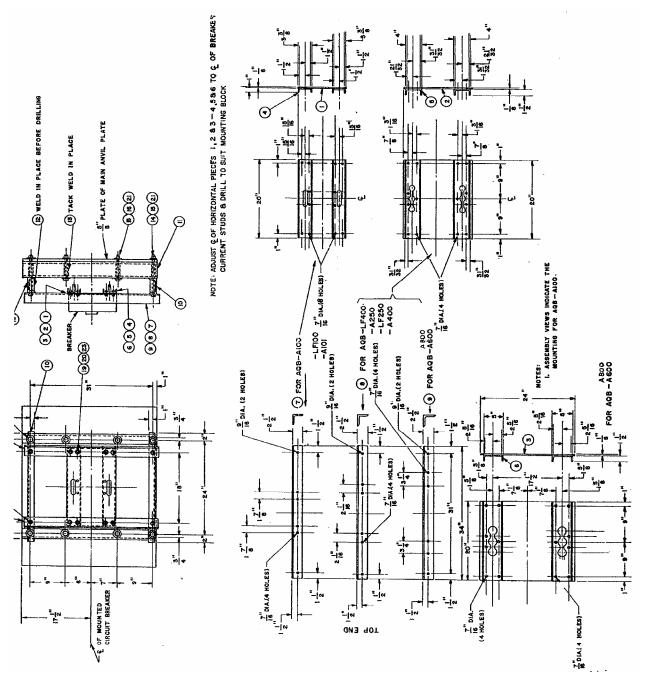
Standard mounting for shock testing drawout-mounted type AQB circuit breakers - Continued.
